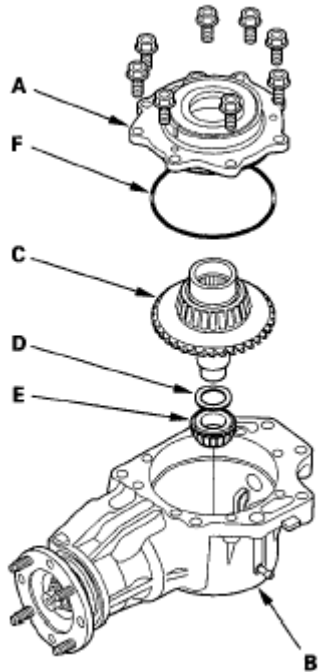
Identifying Transfer Cover, Transfer Housing And Transfer Hypoid Drive Gear/Shaft Assembly
